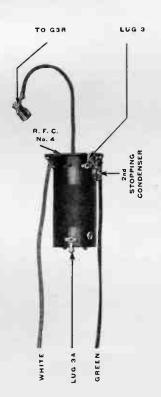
(Below) Coil Group, Showing Location of Parts and Connections of Leads.
